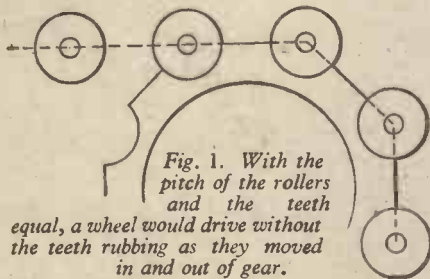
With the pitch of the rollers and the teeth equal, a wheel would drive without the teeth rubbing as they moved in and out of gear.
